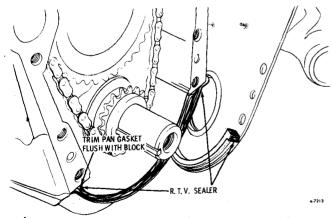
Applying R.T.V. Sealer and Trim ming Pan Gasket
